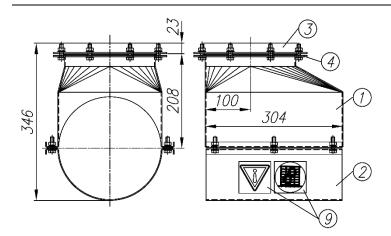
PSU220-I/O-200- screw conveyor -220 - an inlet/outlet -200 to the screw conveyor
